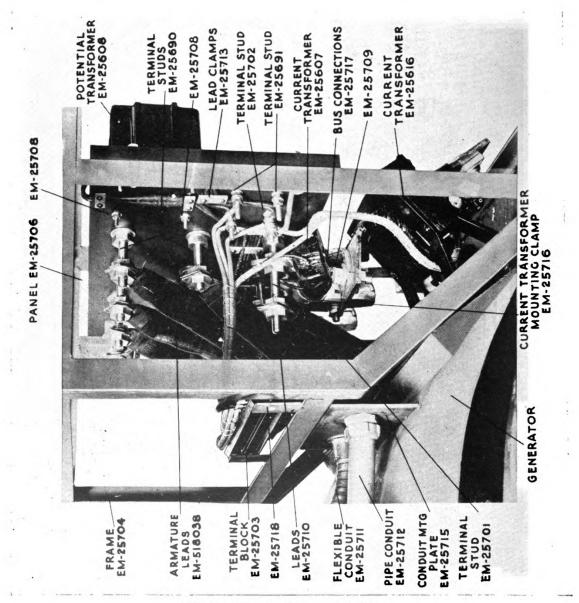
Terminal Box—Side View (Note: Transformer shown at upper left is mounted on rear of panel board on some units.)
